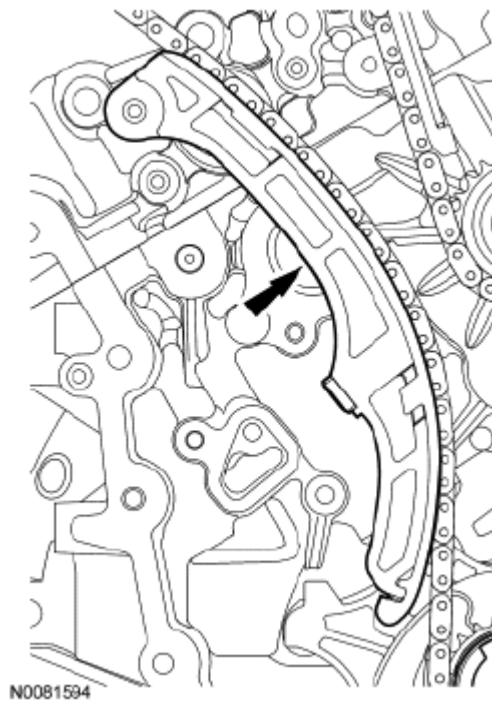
Locating Primary Timing Chain Tensioner Arm
